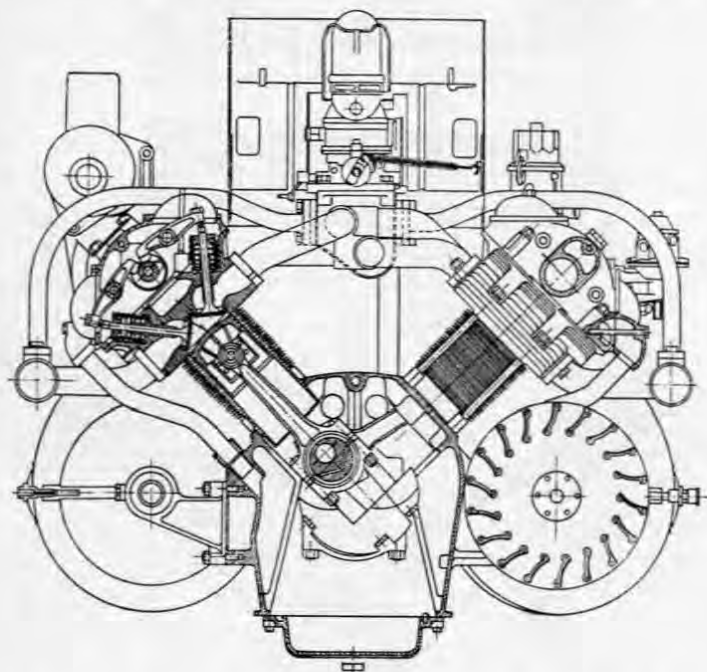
Transverse section of the eight-cylinder Tatra 87 engine.
